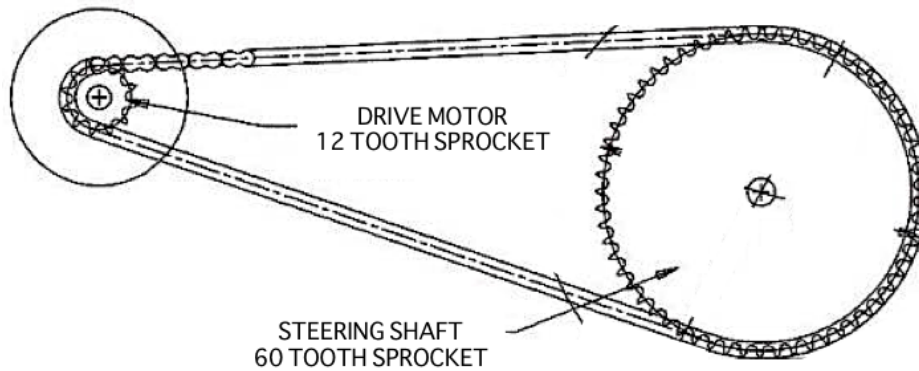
As the Brushed Motor turns (drive motor), a 12-tooth sprocket rotates a 60-tooth sprocket attached to the steering column (driven steering shaft).
